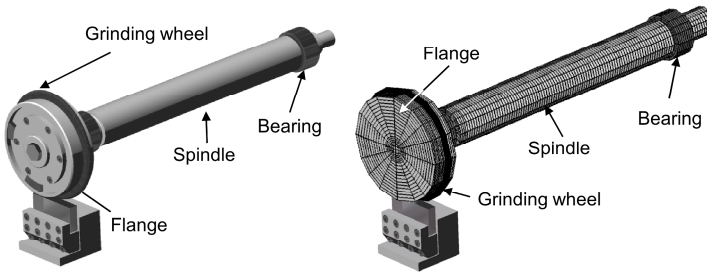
Drawing and finite element model of the spindle and the grinding wheel
